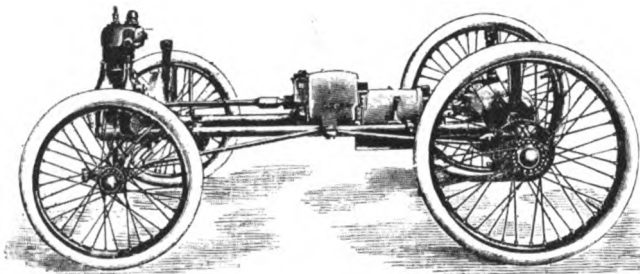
VIEW OF PIEPER ELECTRO-PETROL CAR WITH BODY REMOVED.
